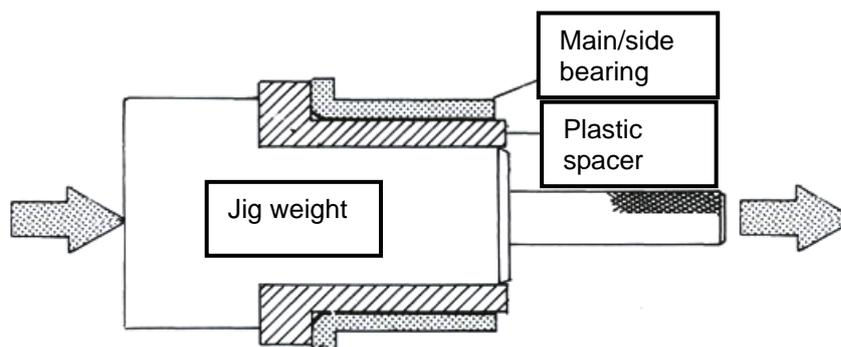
Jig (example) for Press fitting Bearing Installation
